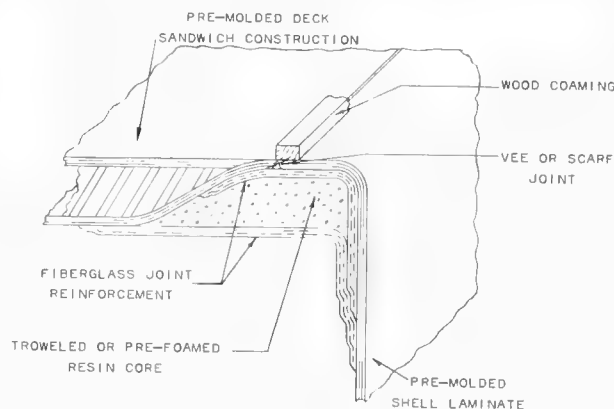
Deck Edge Connection - Sandwich Deck with Wood Coaming and Joint in Deck
